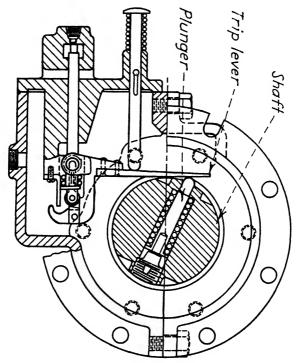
Mechanical overspeed trip mounted adjacent to blower shaft. (Courtesy of B. F. Sturtevant Co.)
